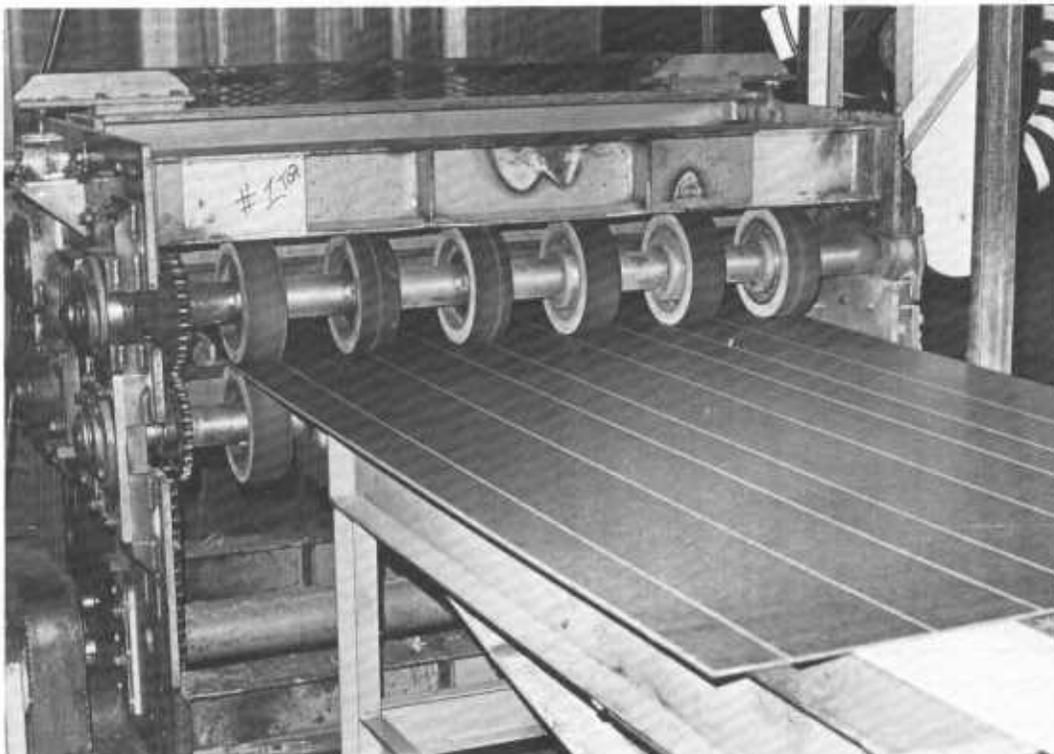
Outfeed end of fixed-knife panel-scoring machine.
